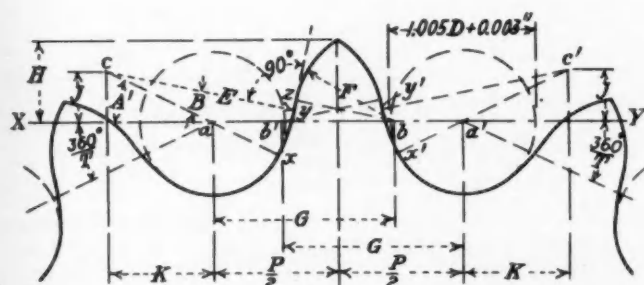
DESIGN OF STANDARD SPROCKET TEETH
